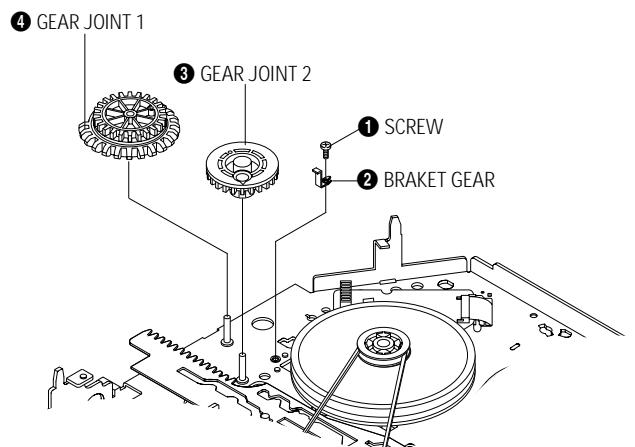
Bracket Gear, Gear Joint 1,2 Removal
